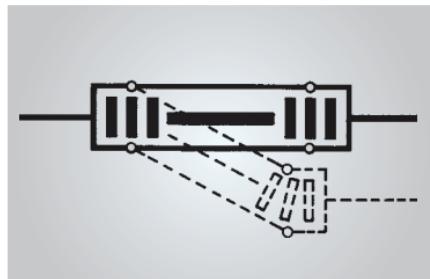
Lateral expansion joint, flexible on all moments. planes. Deflection in anchor plane
